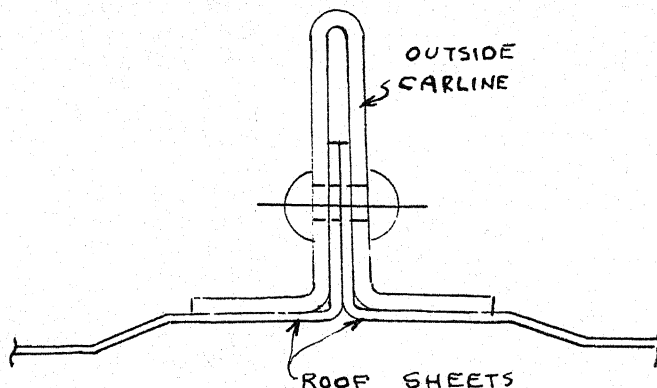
Riveted joint at roof sheet looks tight. However, the vacuum produced when car is in motion, draws foreign matter through the opening. (See Fig. 6.)
